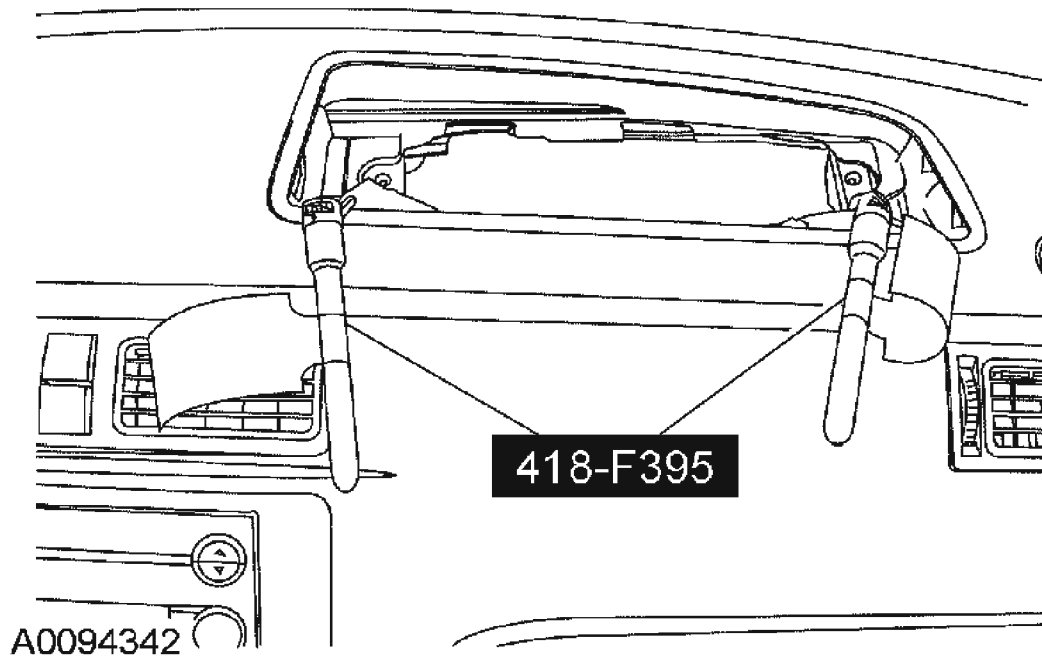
Connecting Restraint System Diagnostic Tools To Vehicle Harness Side Of Passenger Air Bag Module Electrical Connectors
